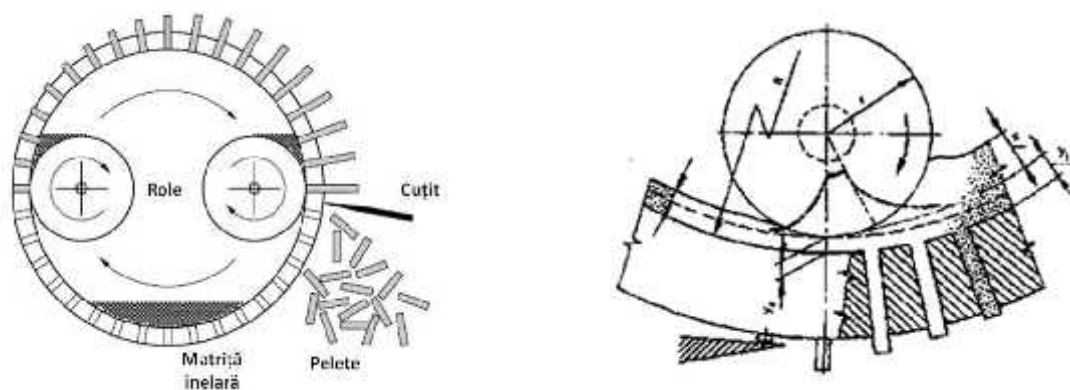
Operating principle of the ring die pelletizing machine [6]
